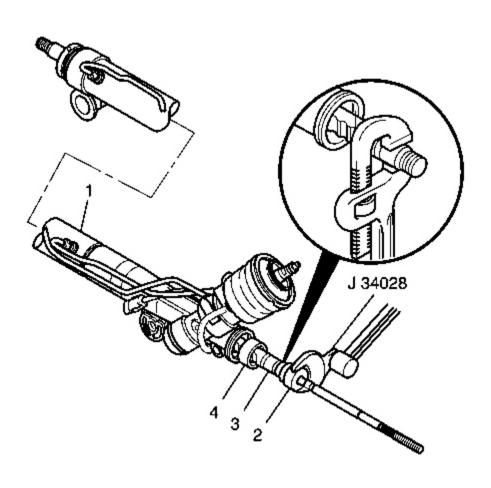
Right Inner Tie Rod Housing, Shock Dampener & J 34028 Courtesy of GENERAL MOTORS CORP.
